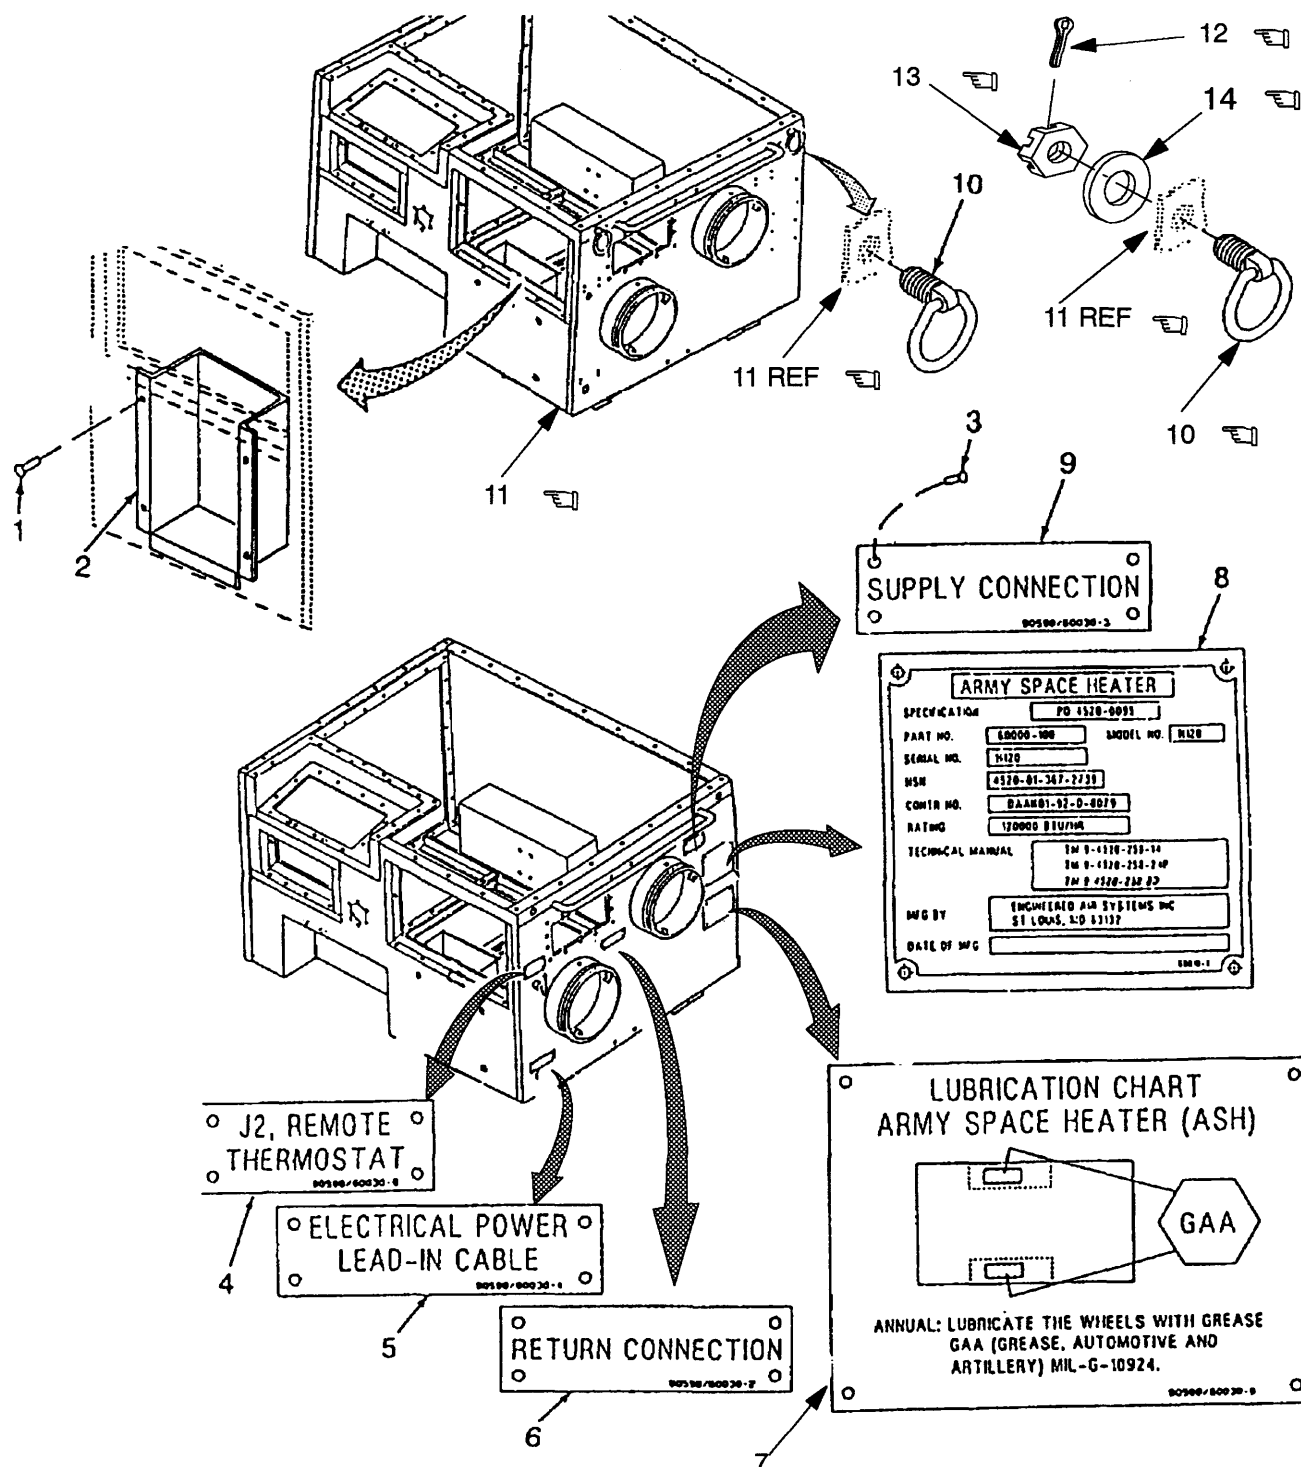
Frame Assembly Disassembly (Sheet 1 of 2)
